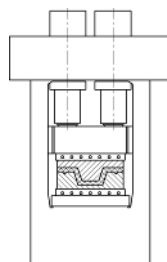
Compression moulding machine shown with mould closed and moulding material formed into shape
